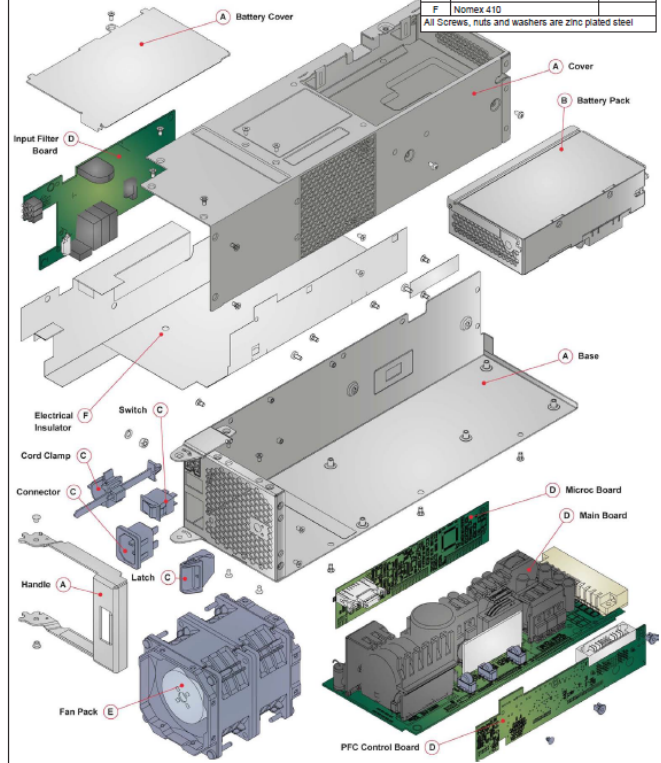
Exploded View of Power/Cooling Module with Battery Pack
